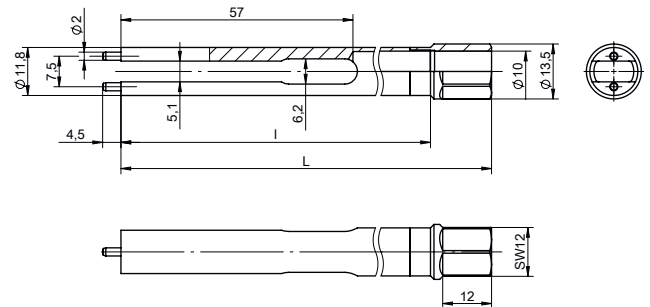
Mounting key for bore $\varnothing 12$ SW12
